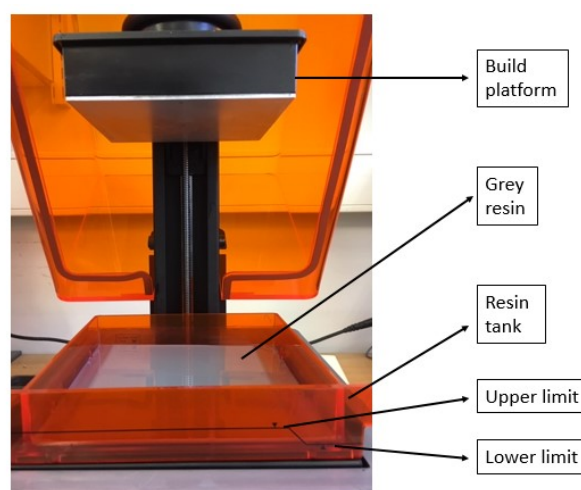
A photograph of the resin tank and build platform of a Form +1 3D printer.
